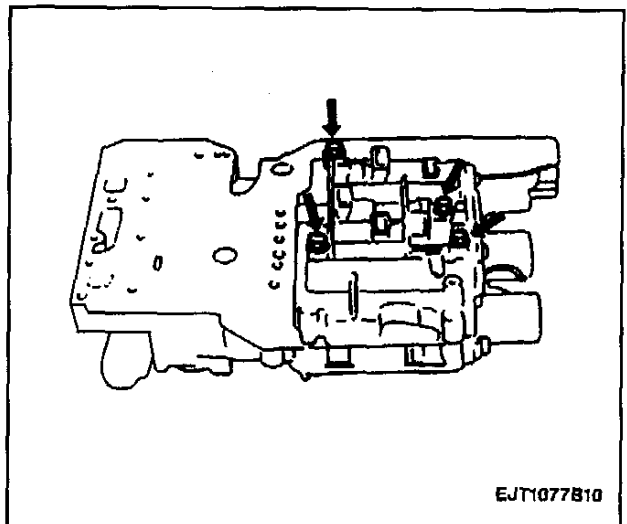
Upper Valve Body Bolt Location (03-72LE, 4-Speed)
